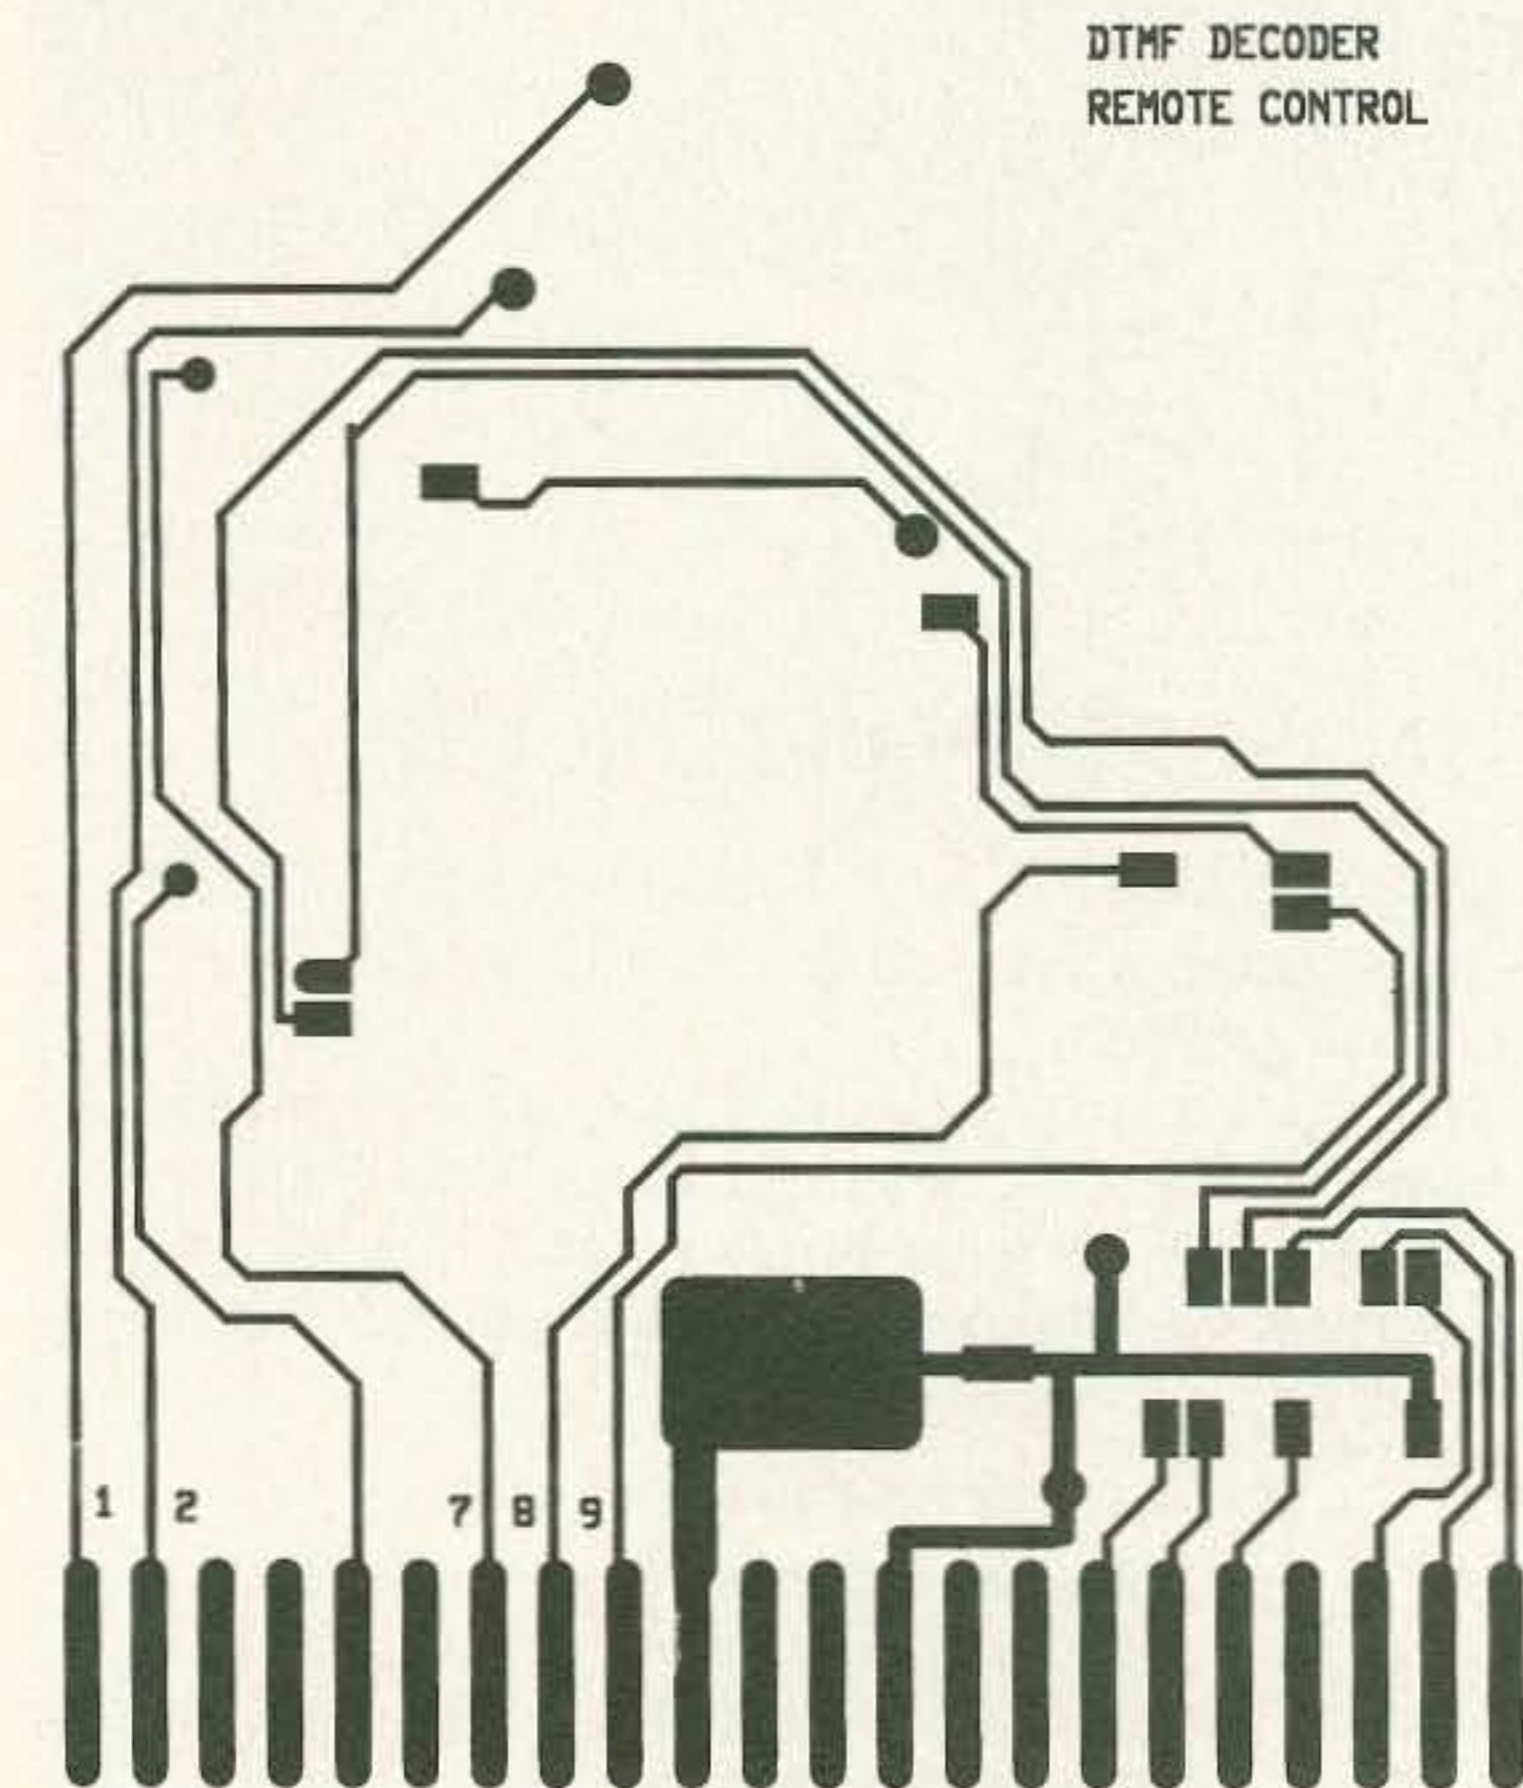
Touch-tone decoder PC board foil pattern (top layer). Solder all pads and pin locations shown on this side.
